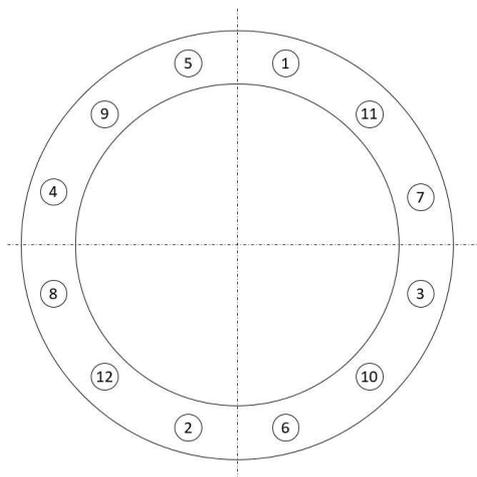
, Tightening sequence flange bolts – a similar criss-cross pattern should be followed for the other numbers of bolts
